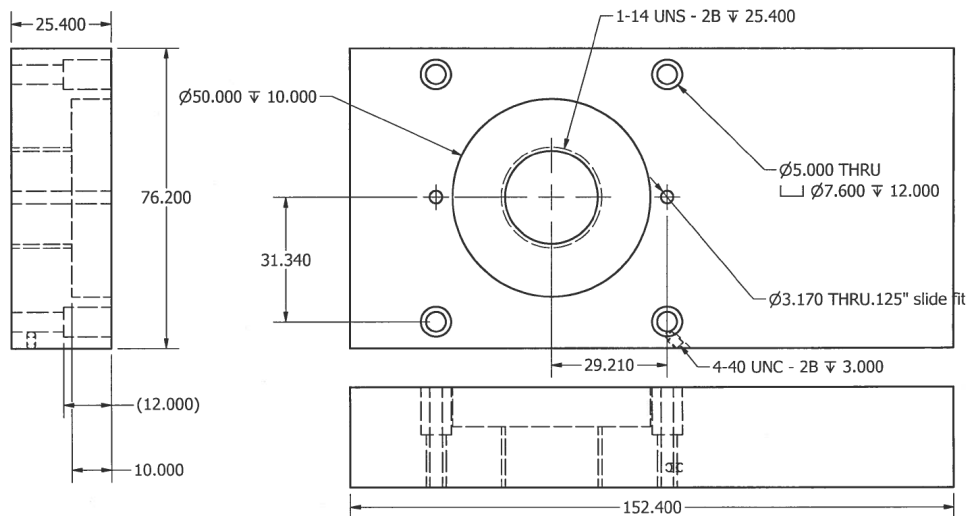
Computer assisted drawing of the adapter plate machined to connect the APT unit to the representative telescope. One side of the plate had threads to screw onto an extension tube for the telescope focuser, and the other side had locater pins and threads for interfacing with the APT.
